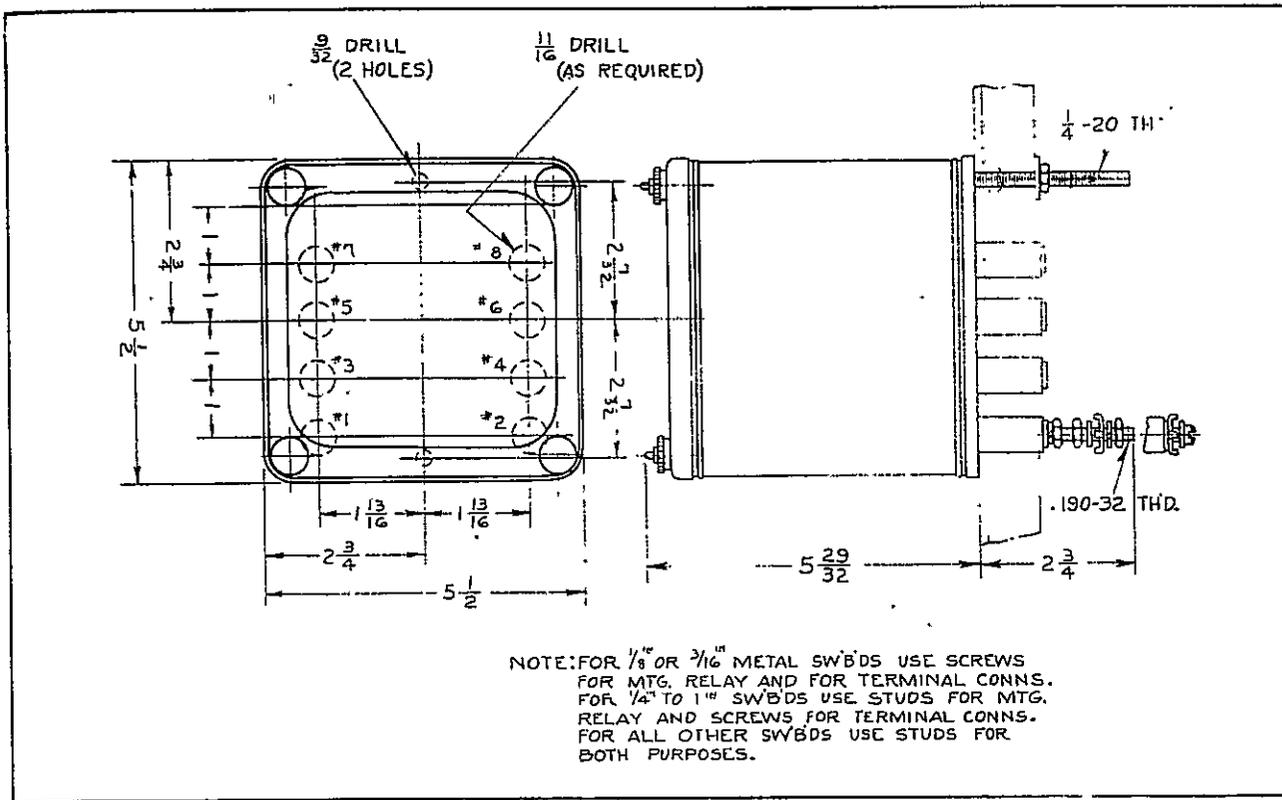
Outline and Drilling Plan for the Type TH Single-Element Relay.
